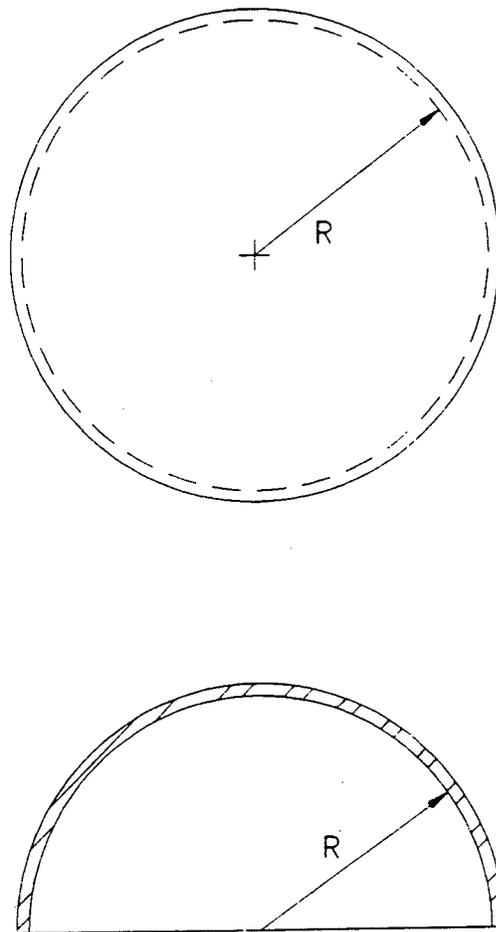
Typical hemispherical head used on cargo tanks designed for higher pressure.
